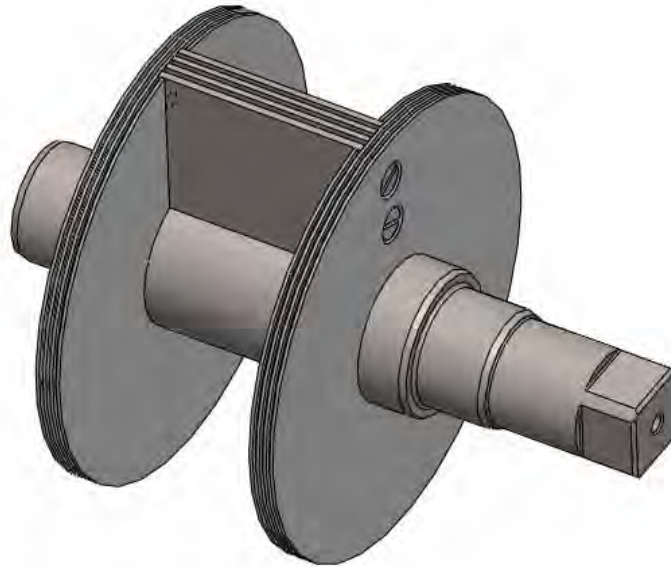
The 3D-view of blade with side discs (with labyrinth seals on cylindrical surface)
